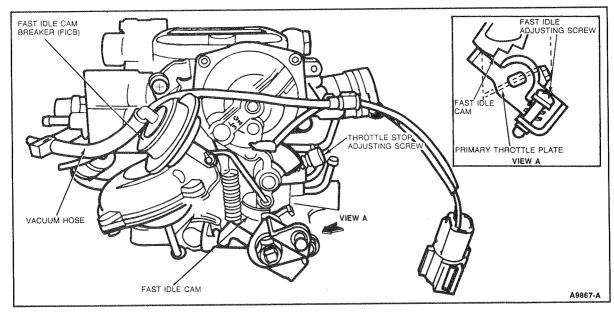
2.0L Engine Carburetor Fast Idle and Throttle Stop Adjustment
